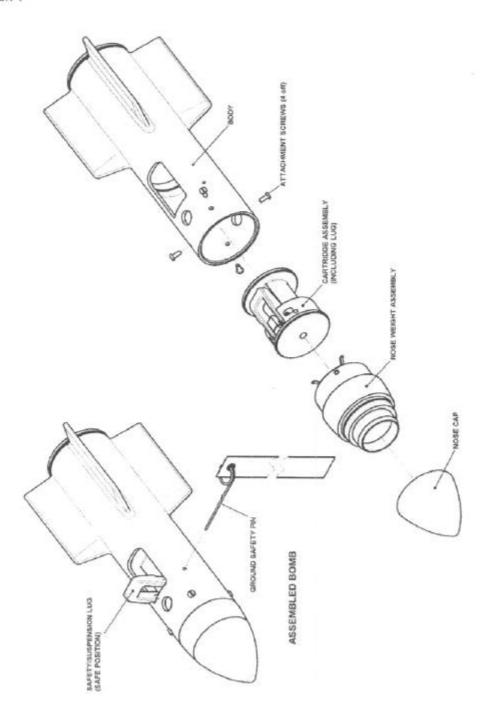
Assembled and Exploded view of 3 kg Practice Bomb including GSP
